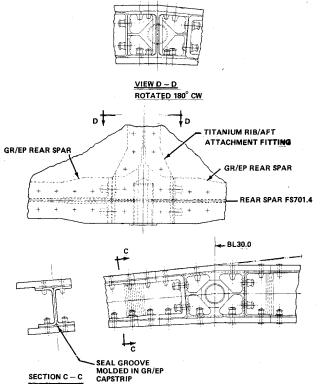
Wing fuselage attachment - rear spar, wing joint.
